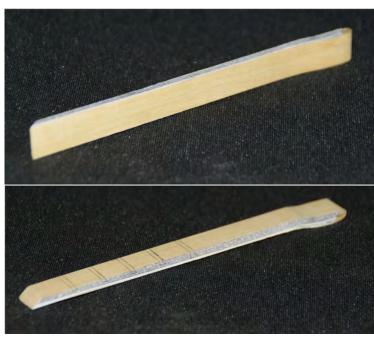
The length of the head rails is calculated based on plate 15. Other dimensions are (46) beak 3 x 2 mm. The main rails are in two pieces that are glued together for construction and finishing. Once shaped, a bead must be cut.
